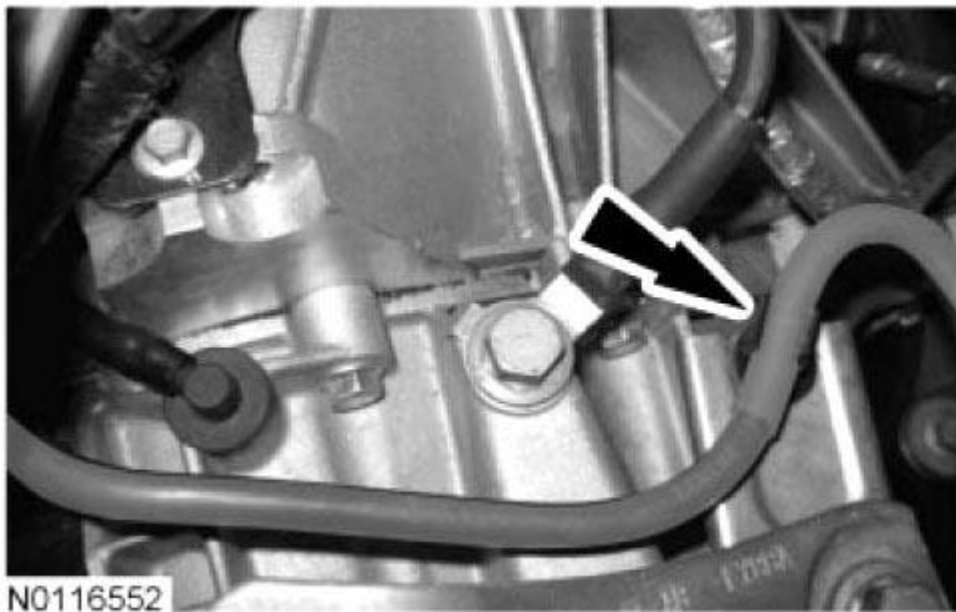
Locating Clutch Hydraulic Hose From Transaxle Retainer
